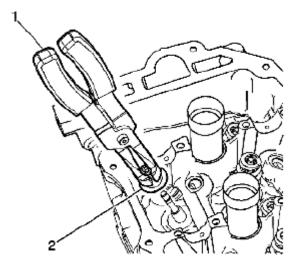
Removing Valve Stem Seal Courtesy of SUZUKI OF AMERICA CORP.
